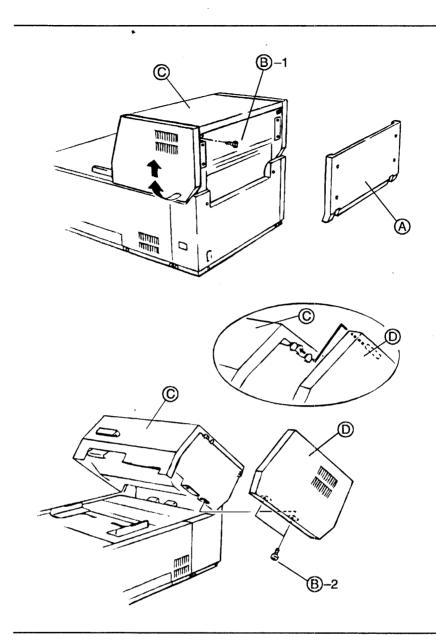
Removing Rear Cover of IS520 Upper Unit
